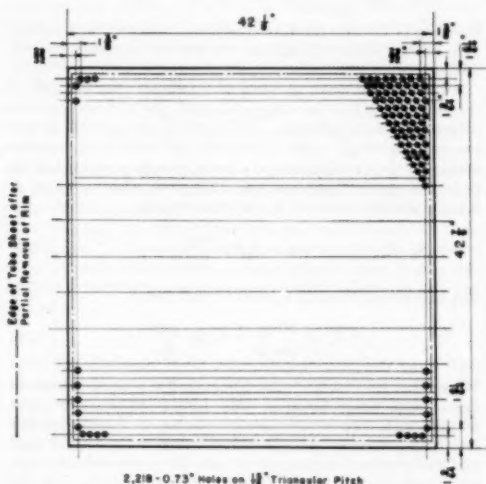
TUBE SHEET NO. 1, 42 1/8 IN. X 14 1/2 IN. X 0.510 IN. FOR EXPERIMENTAL TESTS
